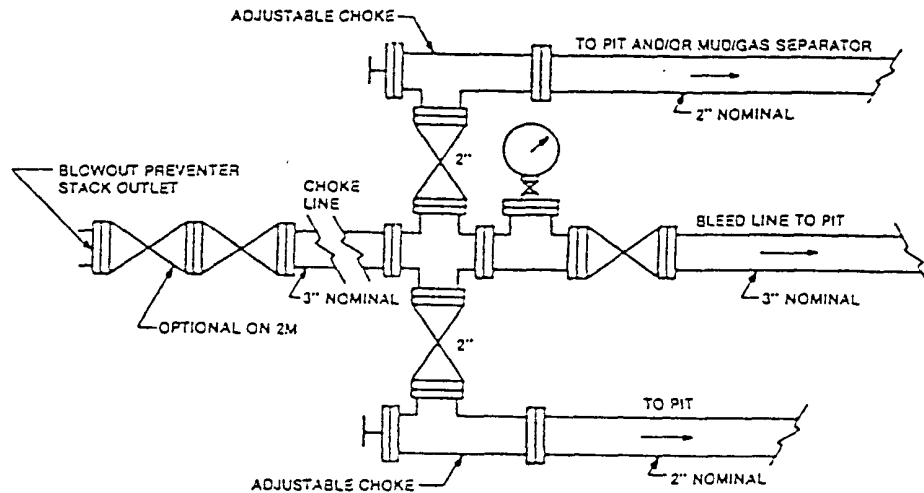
Typical choke manifold assembly for 2M and 3M rated working pressure service — surface installation.
